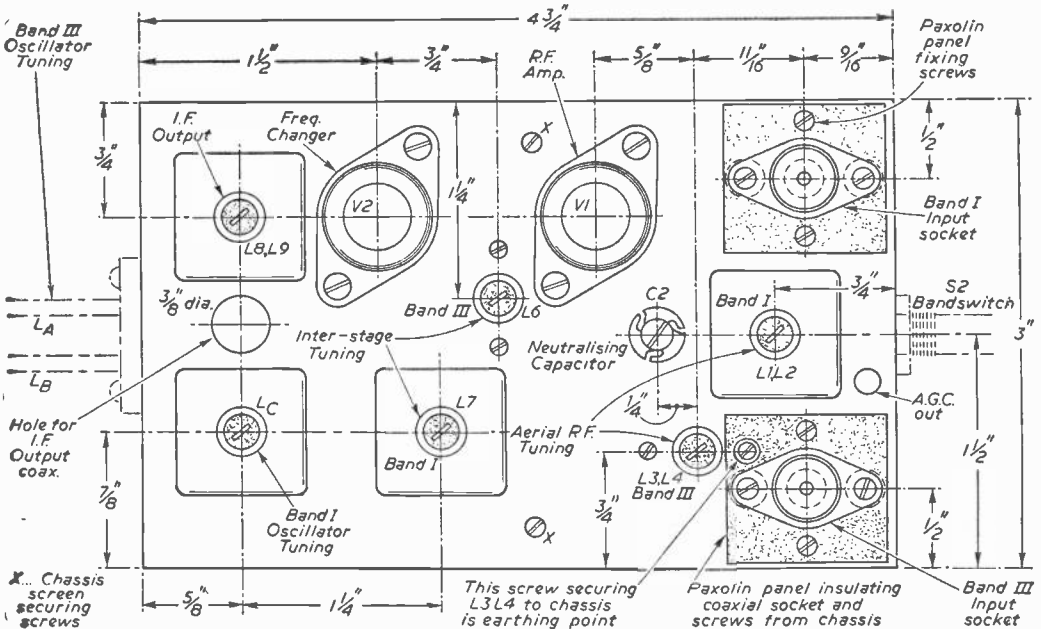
The above-chassis layout and dimensions of the tuner chassis.
